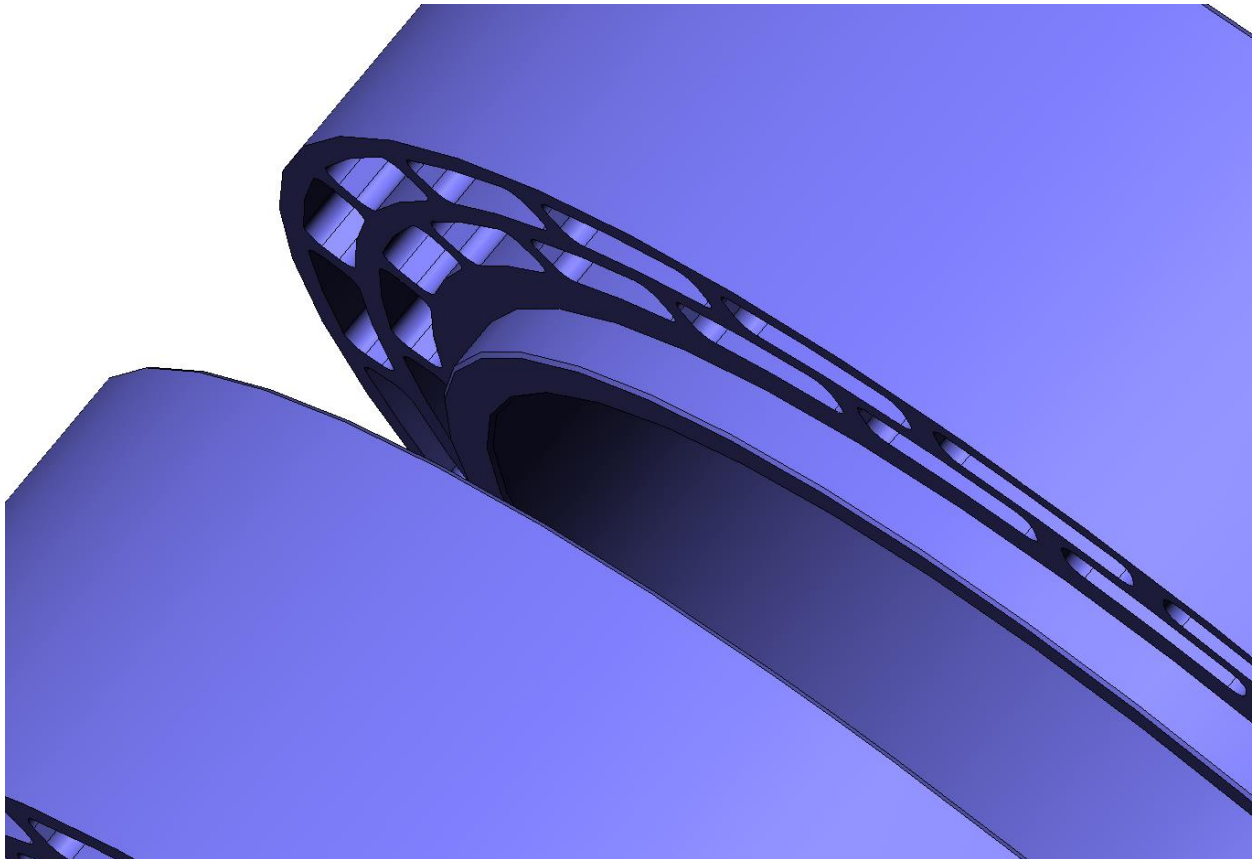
DETAILS OF THE MONOLITHIC SHIELD CYLINDERS SHOWING THE OVERLAPPING JOINT DETAIL (SURFACE FINS NOT SHOWN)
